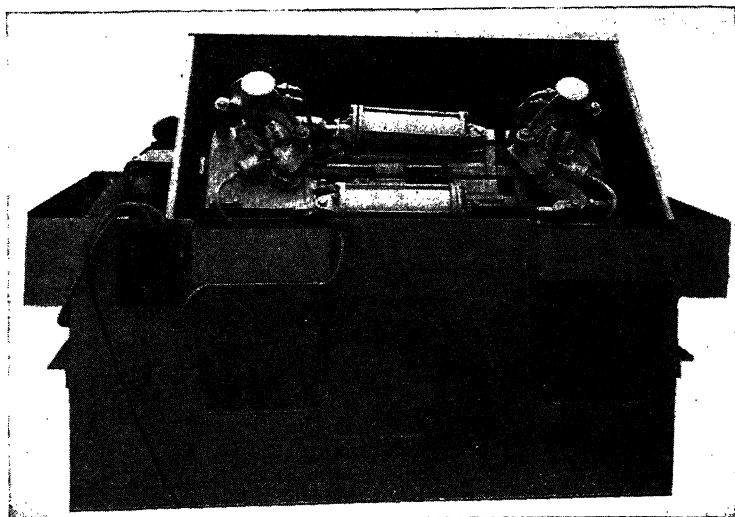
Quenching machine for automobile stabilizer shafts, designed to minimize distortion of the shafts during quenching.
